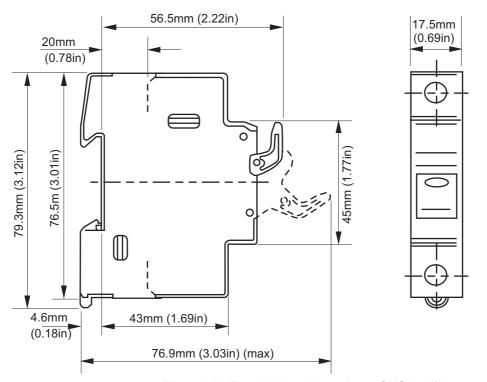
Fuse holder dimensions: CUS101 (10x38mm)
